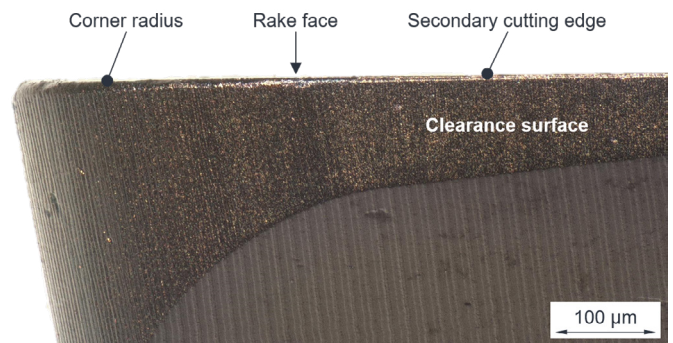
View of the clearance surface of the tool on the secondary cutting edge after 401 manufactured parts.
